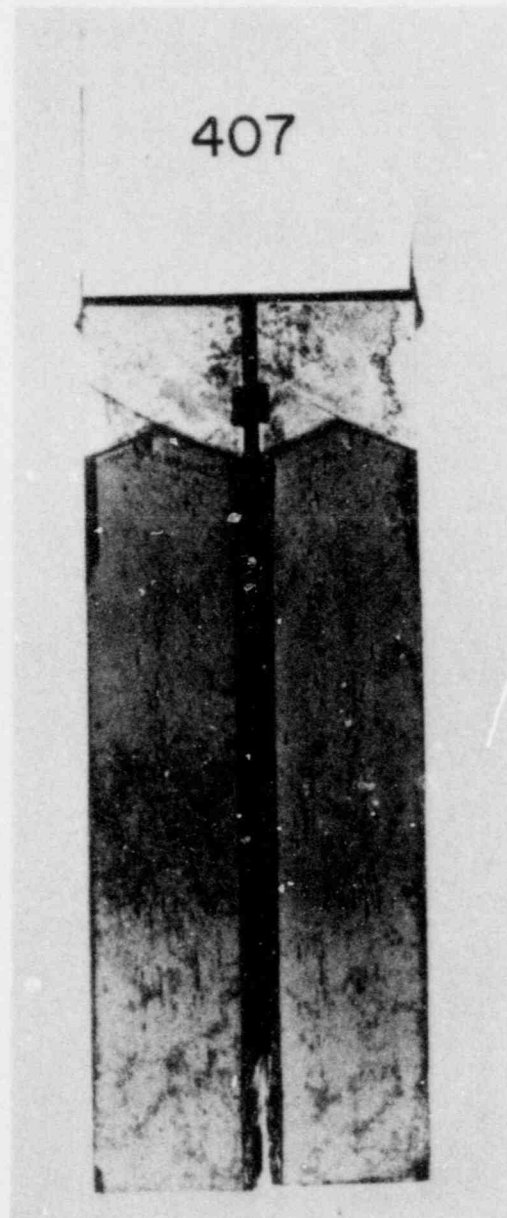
Typical Fracture Surface in $R_c 50$ Specimens.
